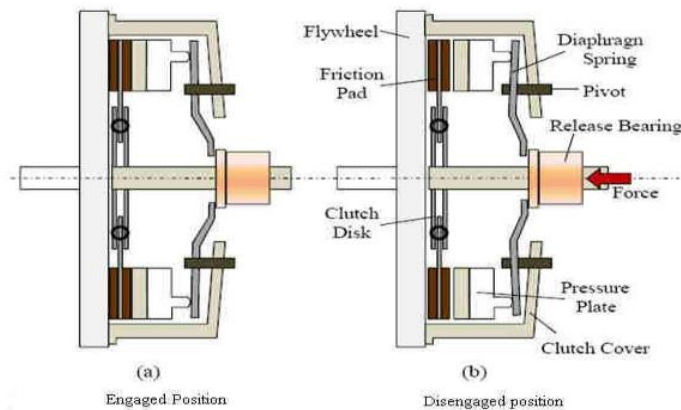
Clutch plate assembly. (a)Engaged (b)Disengaged position
